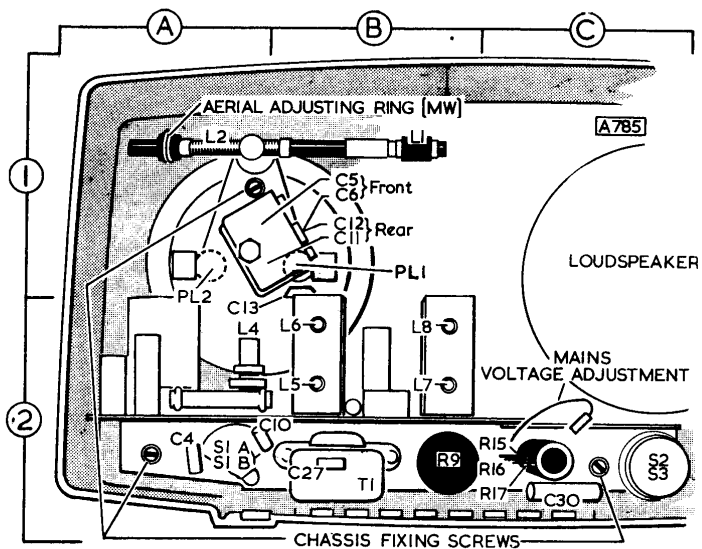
Rear view of receiver showing the locations of trimming adjustments and components not mounted on the printed board.
